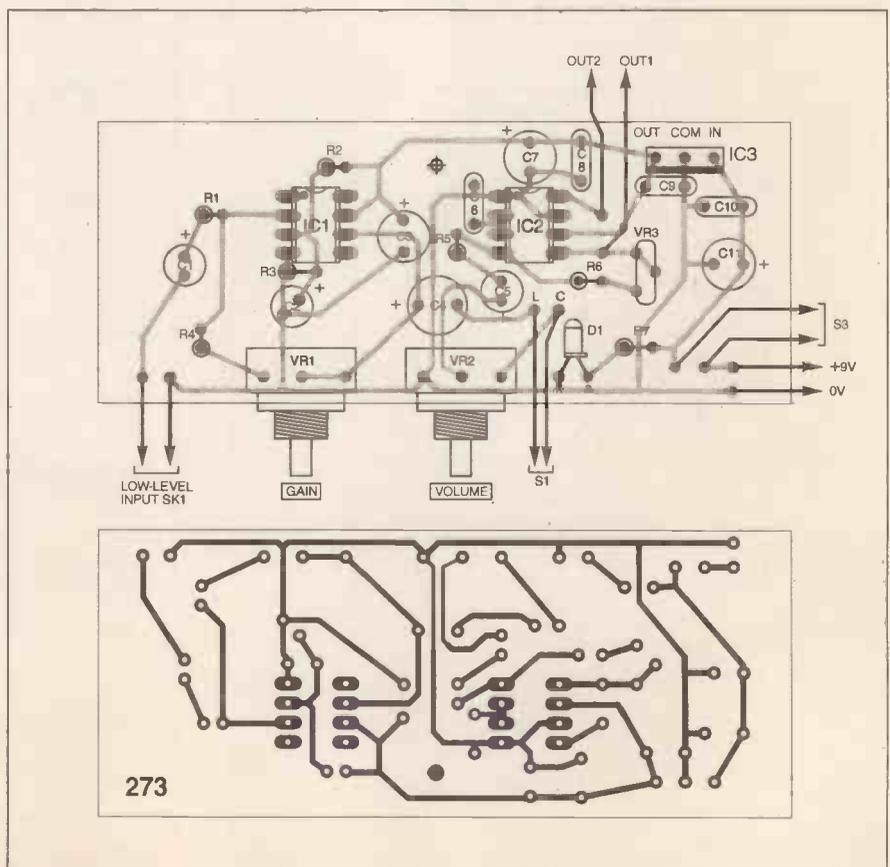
Handy-Amp component layout and full size copper foil track master pattern.
